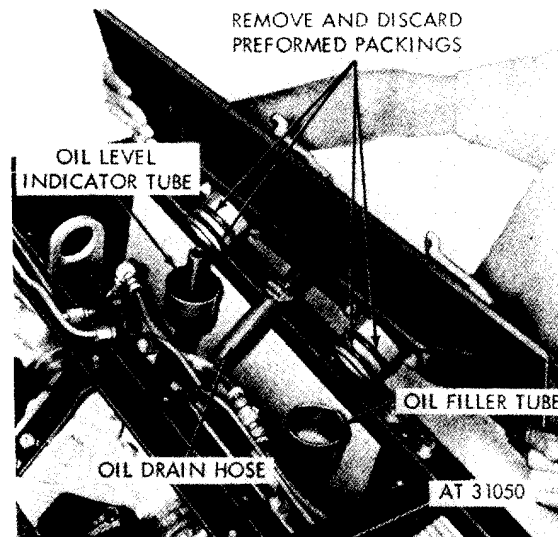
Removing or installing oil filler and oil level indicator tube shroud plate oil drain hose-engines with oil filler and indicator with splash pan drain.
